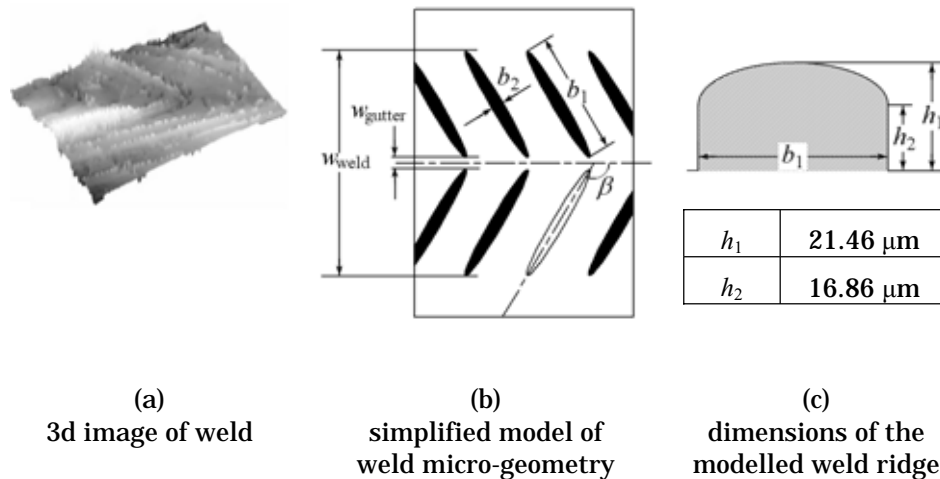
Dimensions of the weld in a tailor welded blank.
